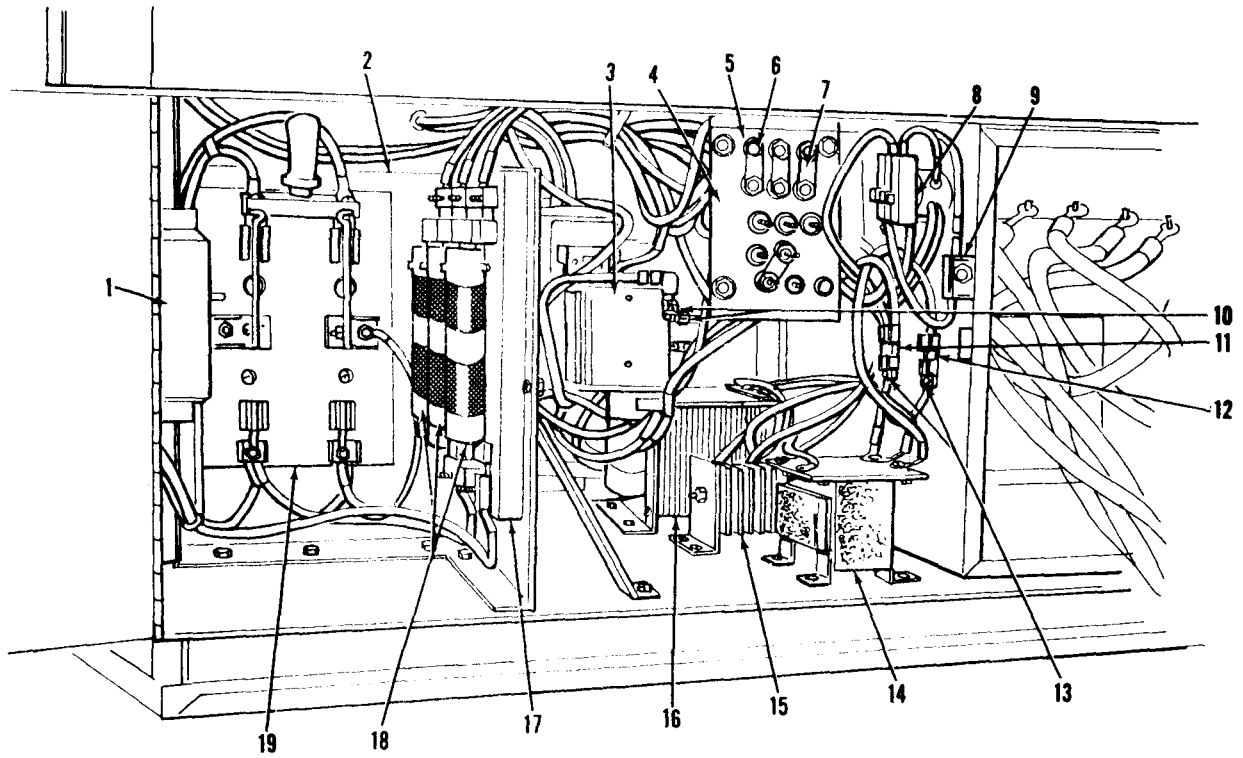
Cabinet, blower duct, and regulator mounting plate assembly (test stands 7336-1, 7336-2, 7336-3).
